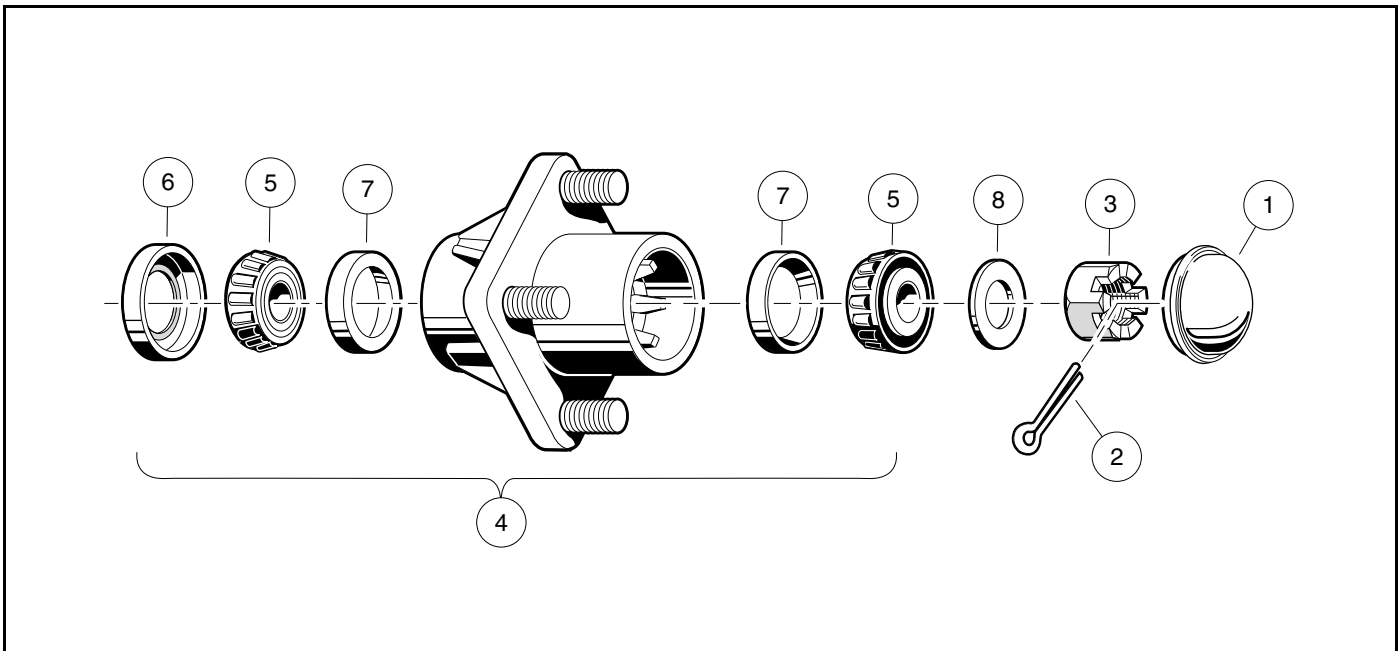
Front Wheel Bearings and Hub – Four-Wheel Brake Vehicles
